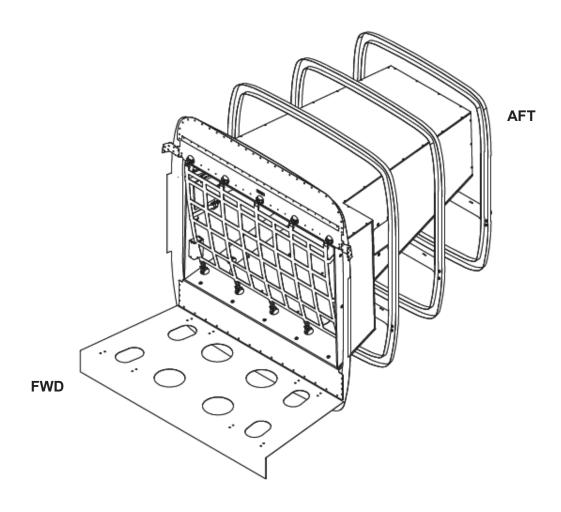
Extended Baggage Configuration -02 (see drawing 1008423)
